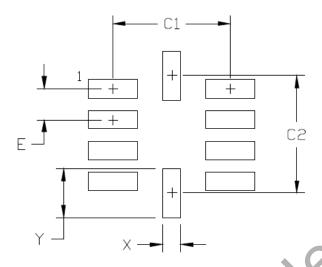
2 x 2 mm DFN PCB Land Pattern
